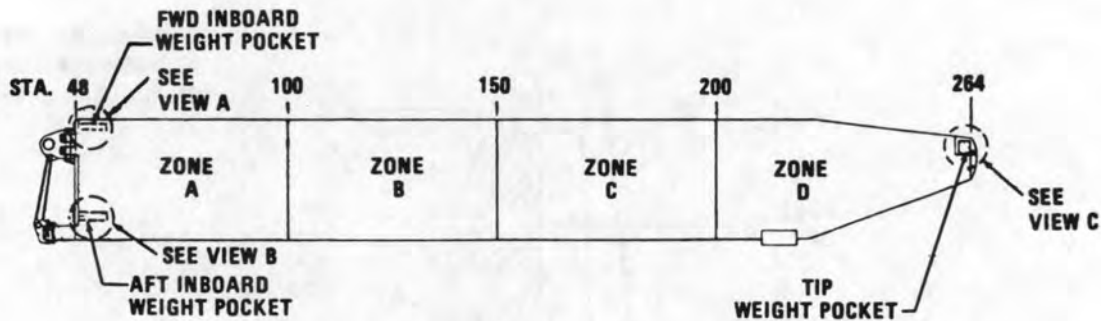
Proximity Limits for Patches — K747 Main Rotor Blades (Sheet 2 of 3)
